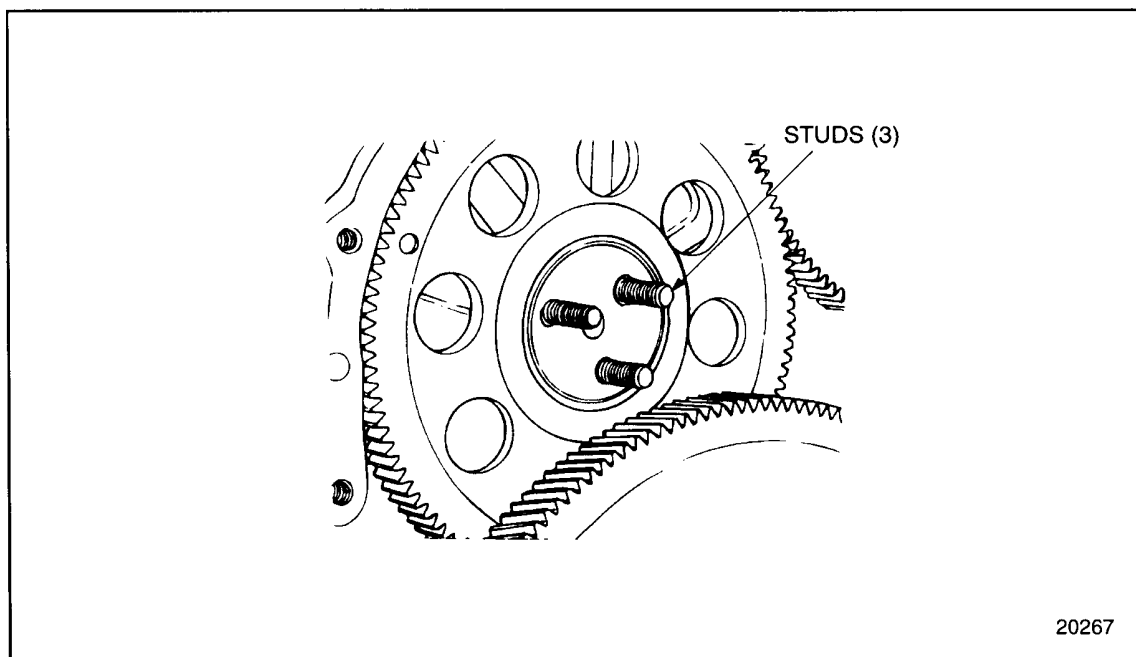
Adjustable Idler Gear and Hub Mounting
